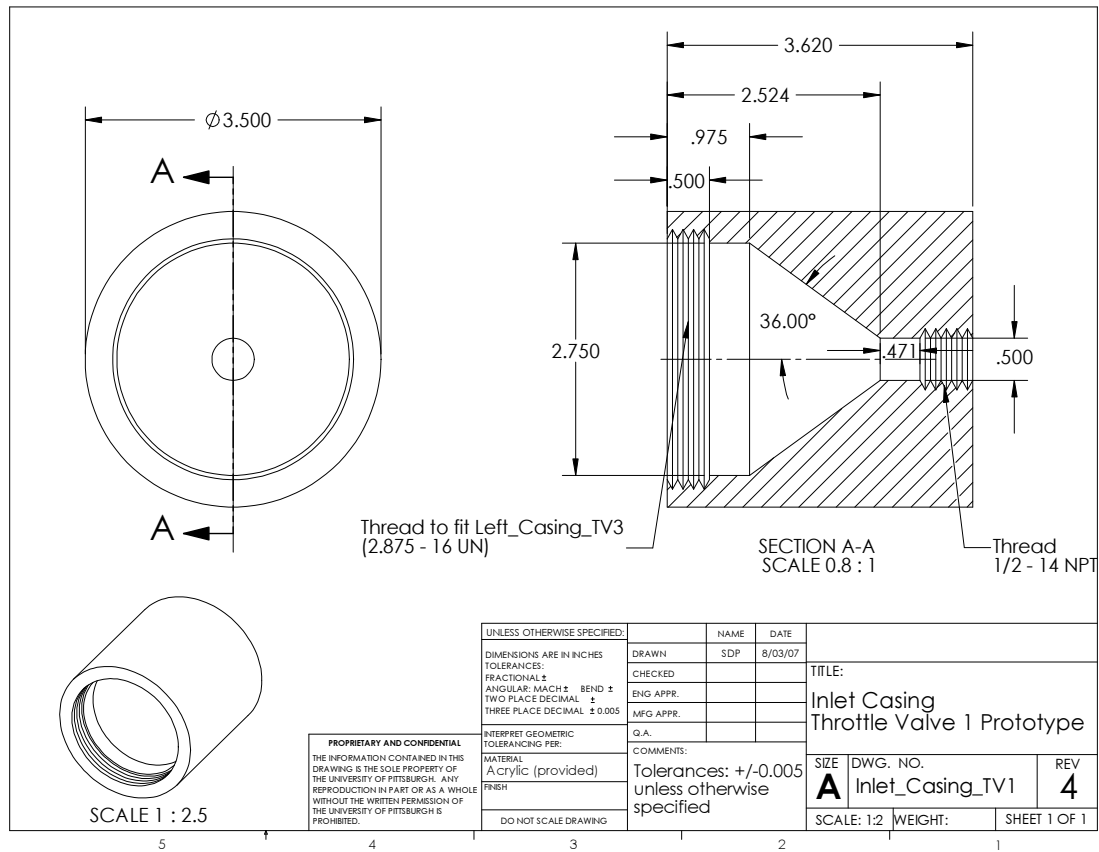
Inlet casing component drawing for barrel valve prototype (TV1).
